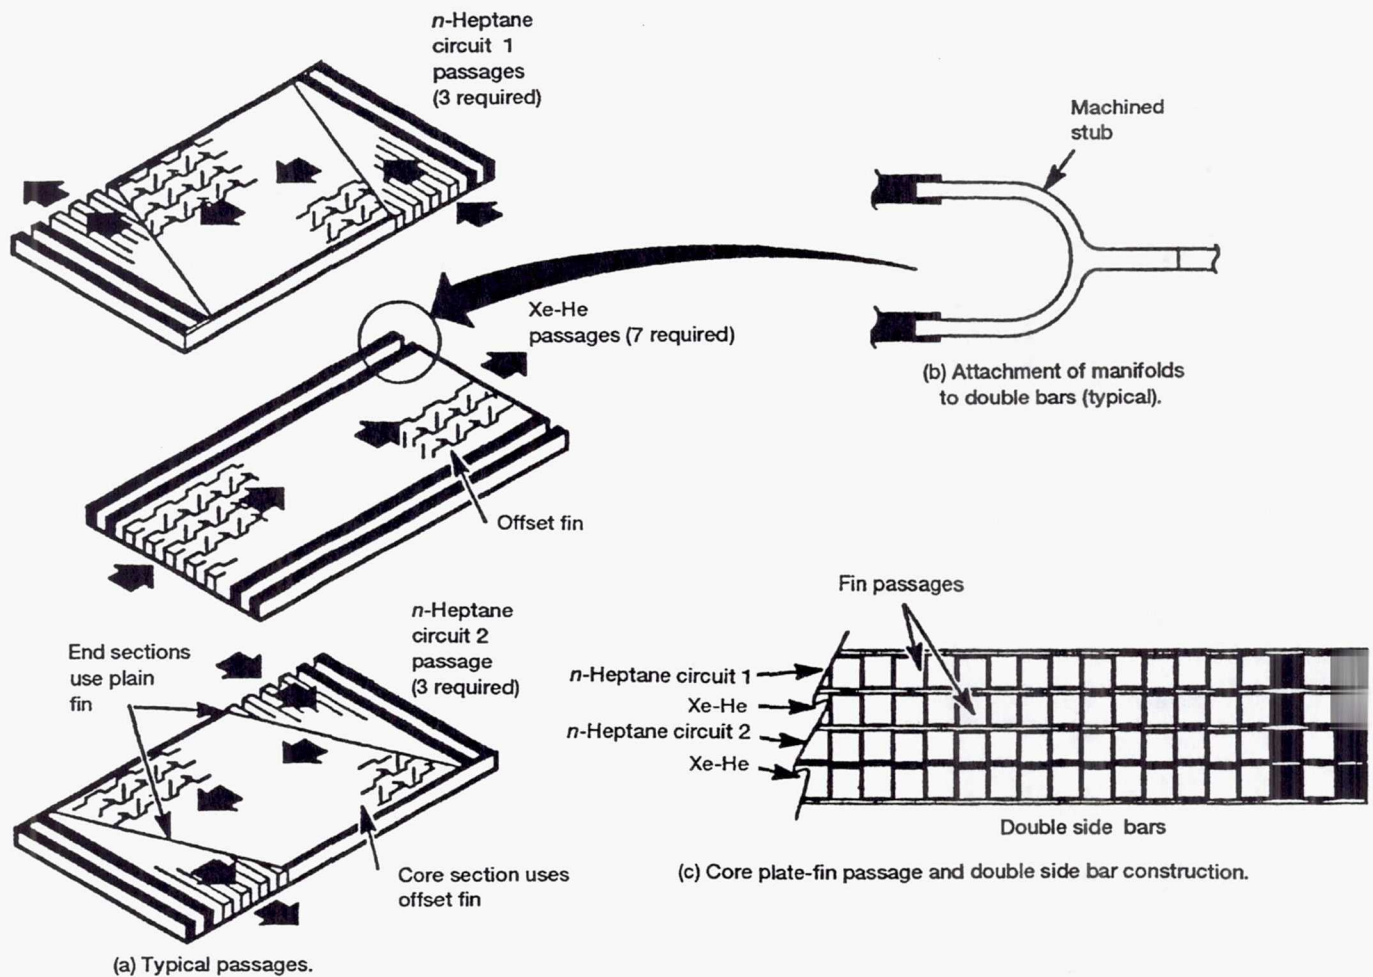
Internal construction (double header bars) of bleed cooler.
